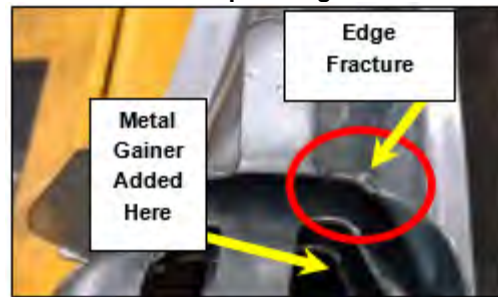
C-12: Local formability edge fracture emanating from a blanked edge in a stretch flange operation and location of metal gainer eventually added to the draw die.
